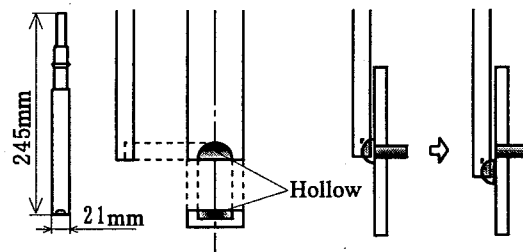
Shape of disassembly tool to cut off the shaft of screw or rivet
